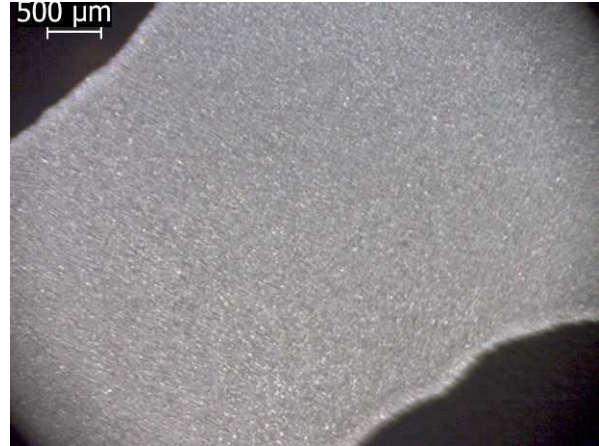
Tin plating on Gold (Au pad on a PCB): the deposit is uniform.
